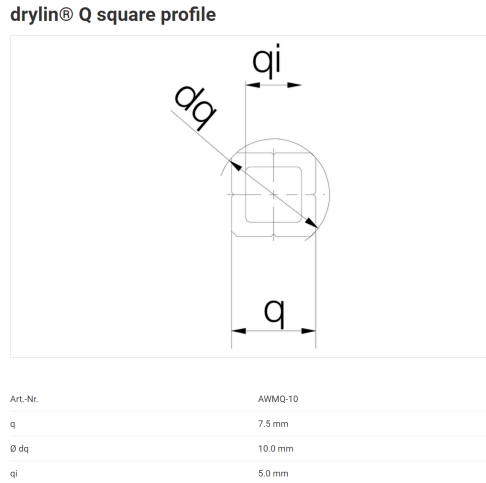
Note the missing inner radial dimensions (the outer radius is not filleted while the inner is, interestingly enough).
